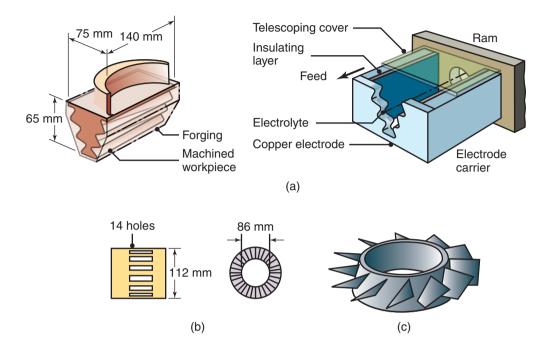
Typical parts made by electrochemical machining. (a) Turbine blade made of a nickel alloy of 360 HB; note the shape of the electrode on the right. (b) Thin slots on a 4340-steel roller-bearing cage. (c) Integral airfoils on a compressor disk.
